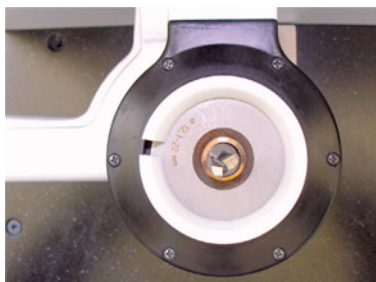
Coil raised, in the diagram shown with a tool for removal.
